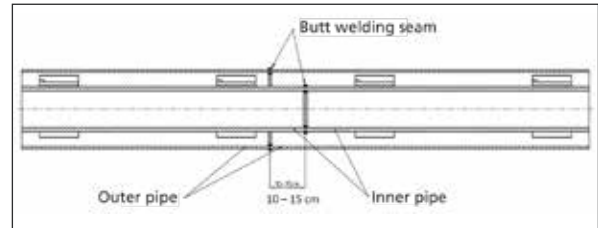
Cascade welding inner pipe with butt welding outer pipe with butt welding with a split heating element
